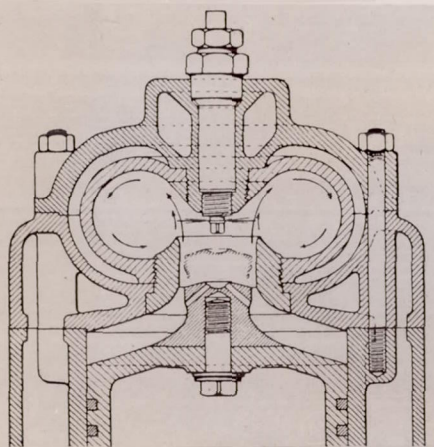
Combustion chamber of Pengeot-Tatrais heavy-oil eng.
